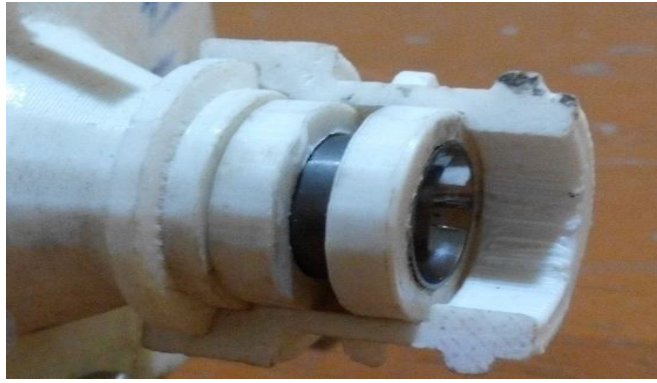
Sectional view of tooling for holding the workpiece (i.e. wire drawing die)
